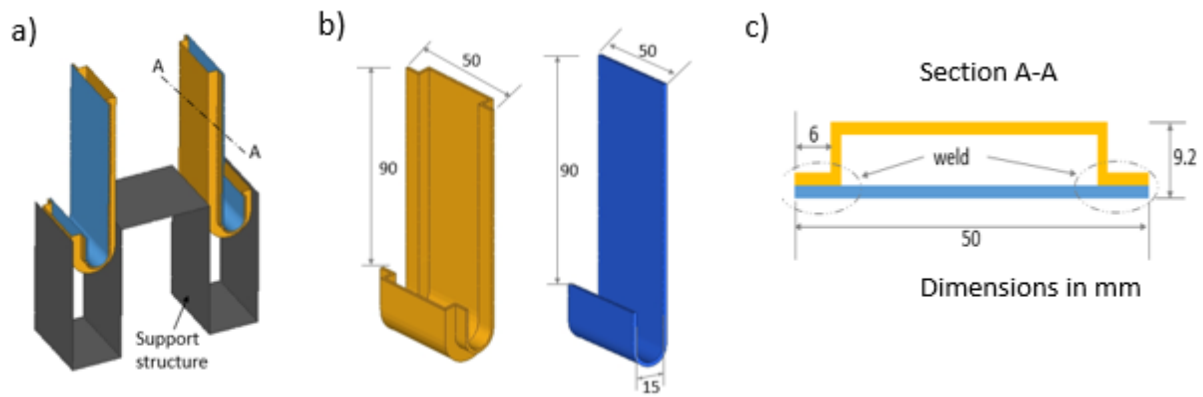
(a) Geometric details of configuration-1 of proposed EA structure, (b) separated view of left side J-type structure and (c) cross section.
